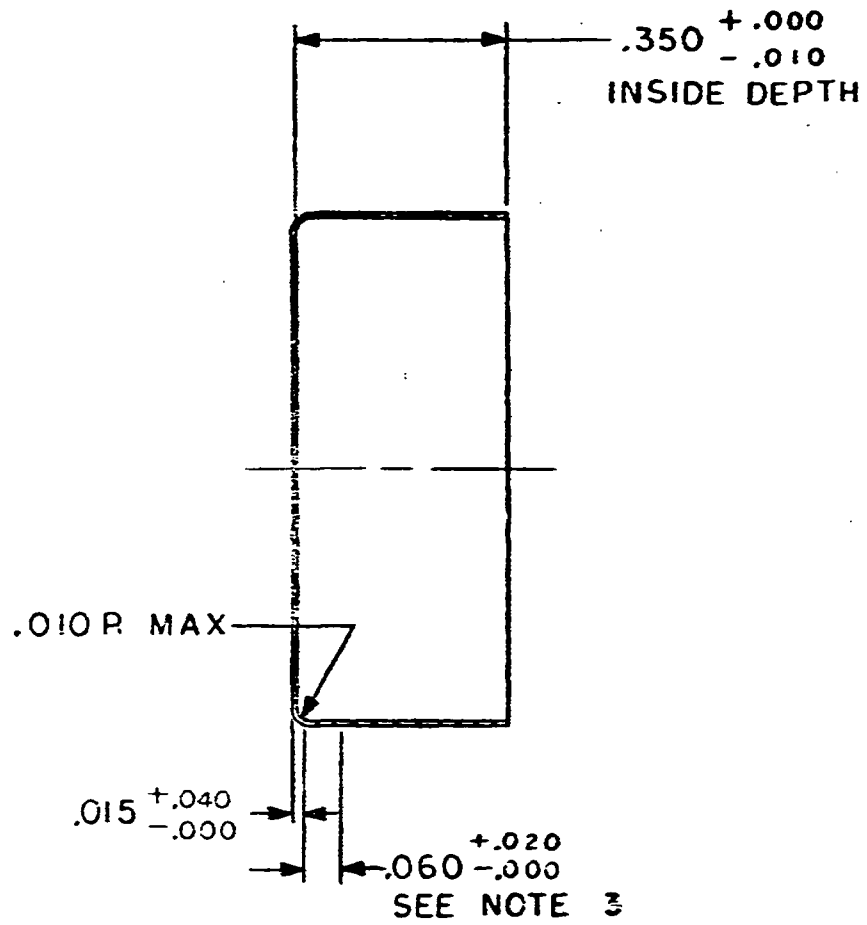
FIN ASSEMBLY, FINAL DESIGN
